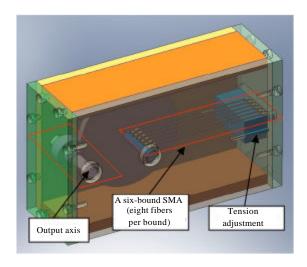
Design of a bending actuator using a six-bunch SMA (8 fibers per bunch)
